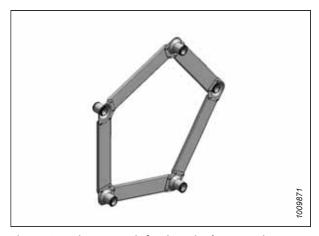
Five-Bat Reinforcing Kit Shown – Six-Bat Reinforcing Kit Similar
